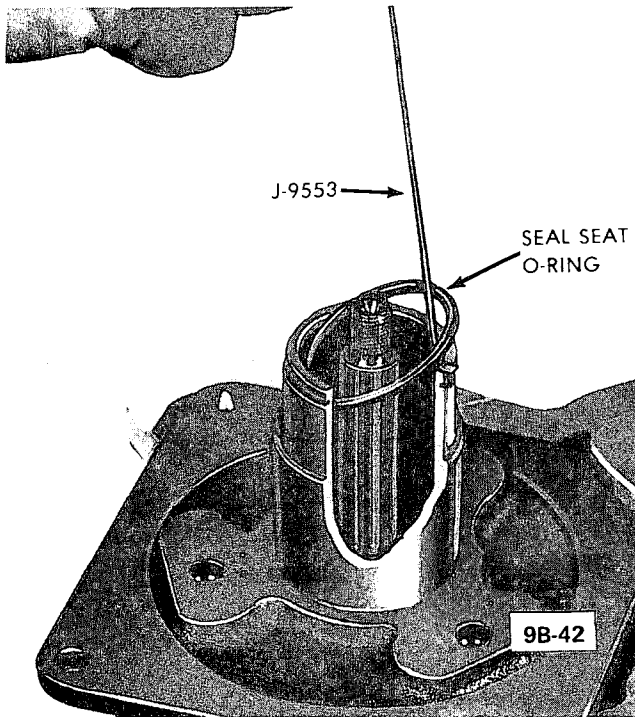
B-65 Removing Seal Seat O Ring - 6 Cylinder Compressor
